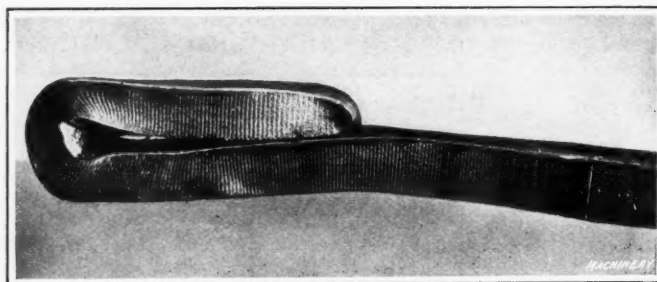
Test Specimen bent Cold, showing Ductility of Weld
